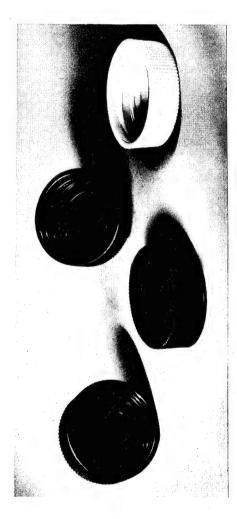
SAMPLES OF CLOSURES MOLDED WITH THE COLLAPSIBLE CORE
